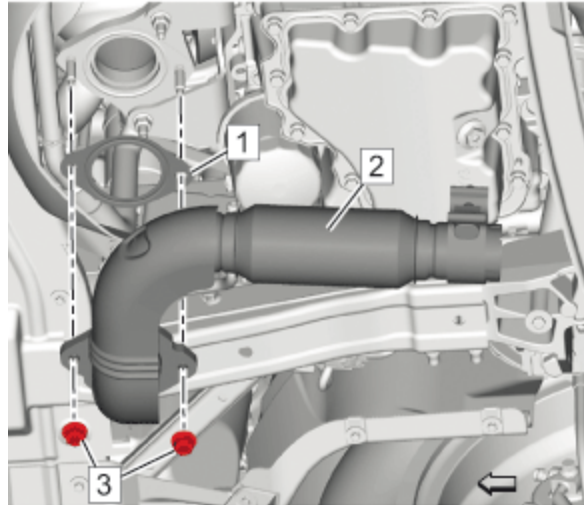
Exhaust Front Pipe, Nuts And Gasket
